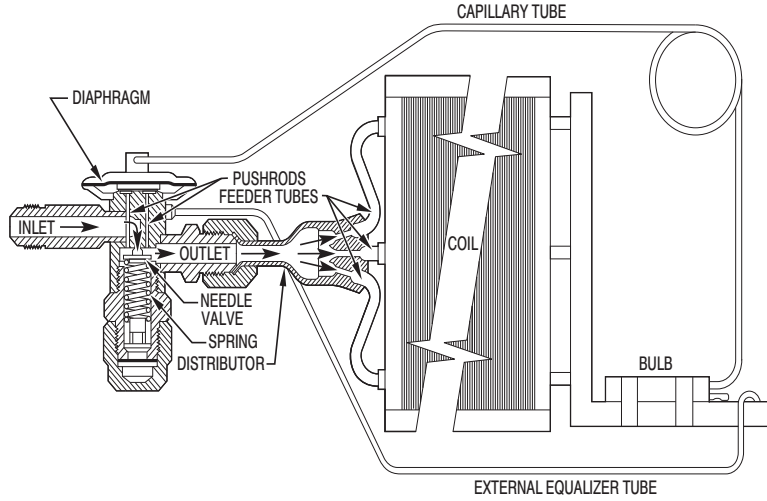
Thermostatic Expansion Valve (TXV) Operation
